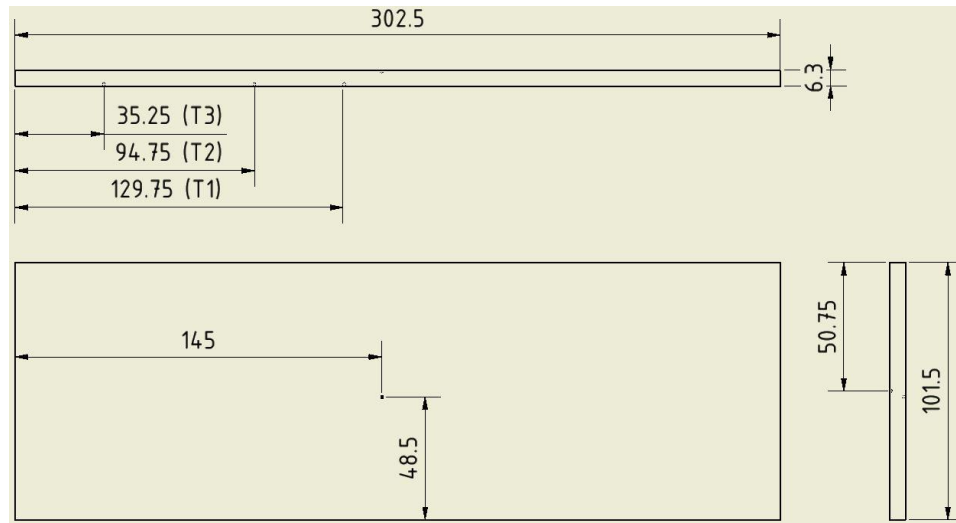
Sketch of the copper sheet used for the measurements. The point where the thermal lance penetrates the sample is indicated, as well as the positions of the three thermocouples (T1, T2, T3) from the other side of the sheet. Dimensions in millimeter.
